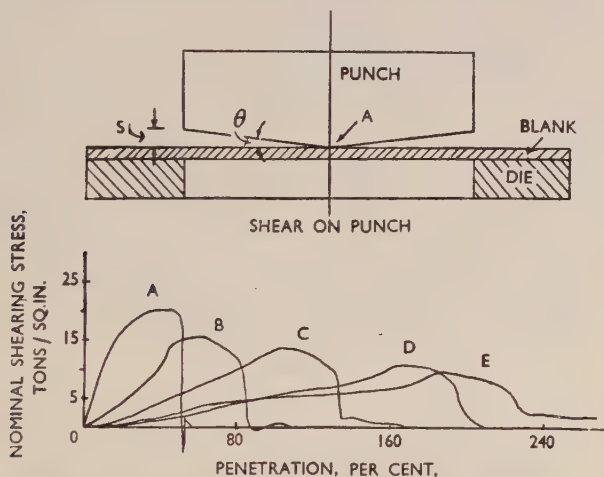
Effect of Tool Shear on 0.080-in. Mild Steel. (Clearance : nil. Tool diameter : 6 in. Shear : (A) nil ; (B) 0.032 in. ; (C) 0.064 in. ; (D) 0.096 in. ; (E) 0.128 in.)
